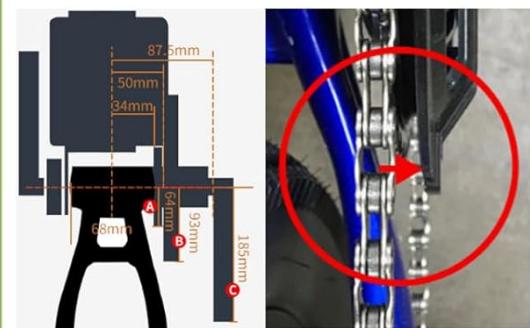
Instructions for checking bottom bracket inner diameter and length, and ensuring chainring clearance.
